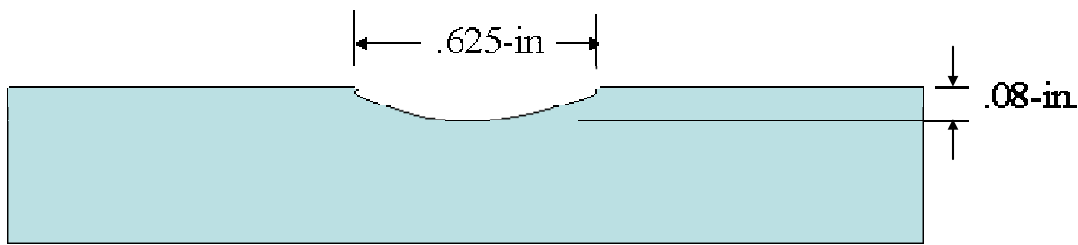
Lincoln Recommended FCB Groove for 5-mm Square Butt Joints
